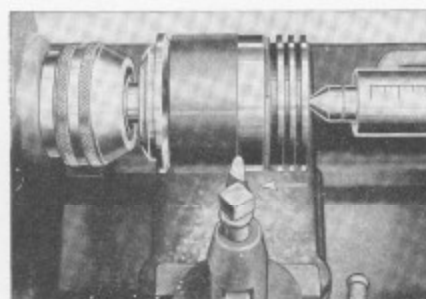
Finishing a Semi-Machined Cast Iron Piston Mounted on the Piston Adapter.
